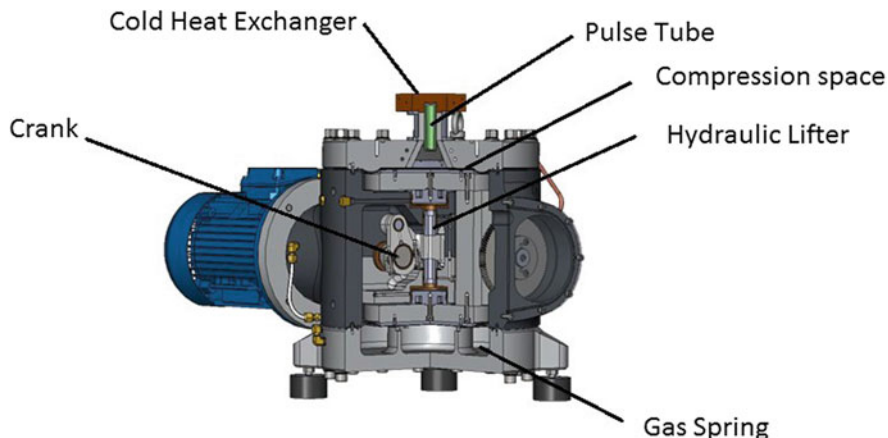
Cutaway view of a diaphragm pressure wave generator and axial pulse tube cryocooler
